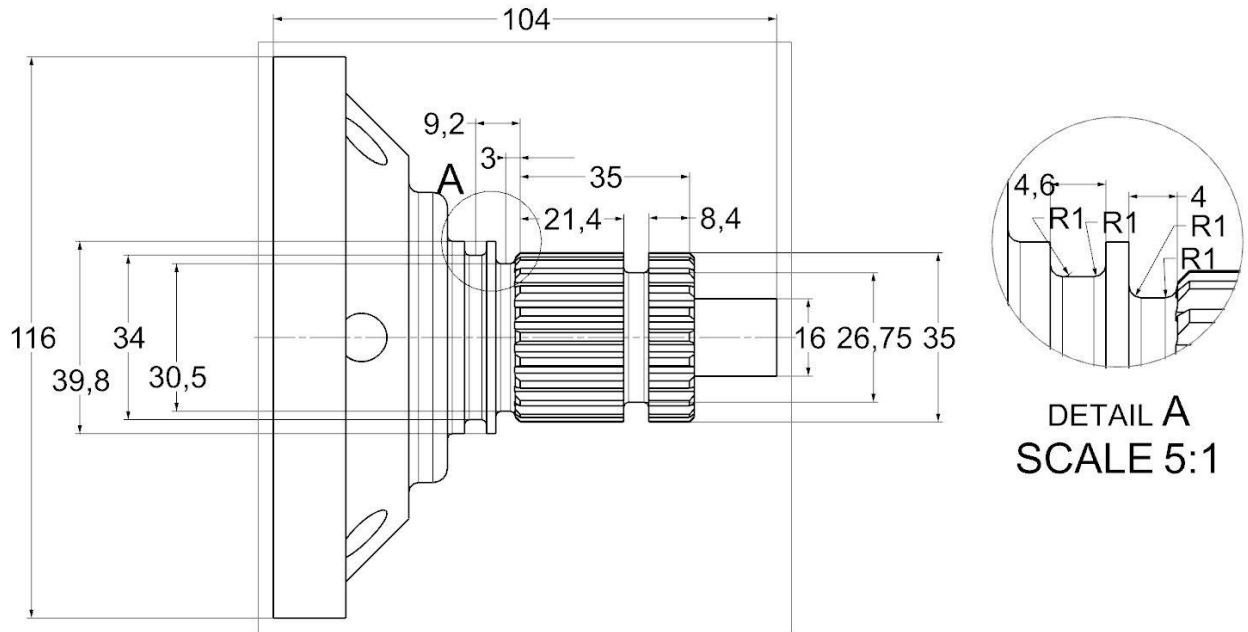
Drawing of the CV-adapter with critical dimensions in mm
